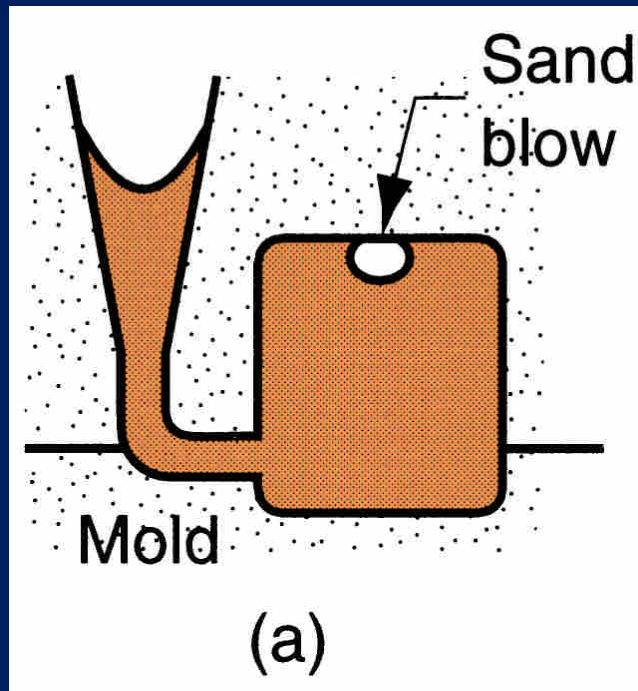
Common defects in sand castings: (a) sand blow
